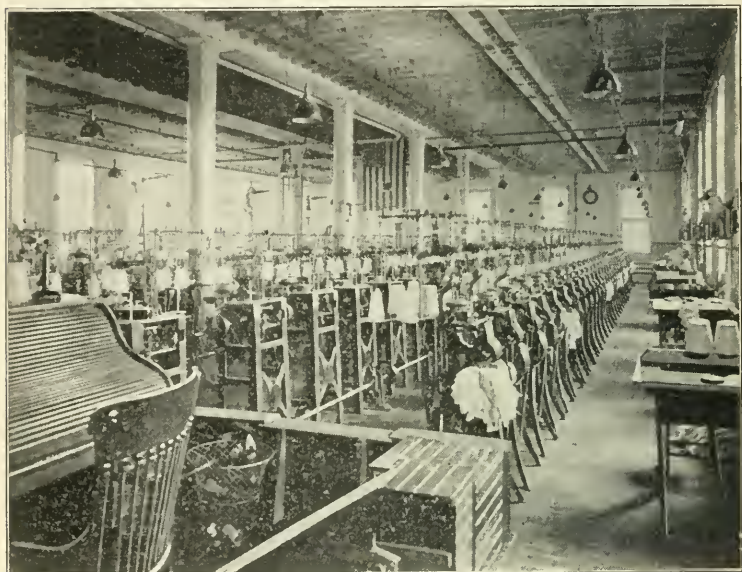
The machines you see in this picture are seamless knitting machines in a hosiery mill in Des Moines. Can you give reasons why a hosiery factory should be located in Iowa?
